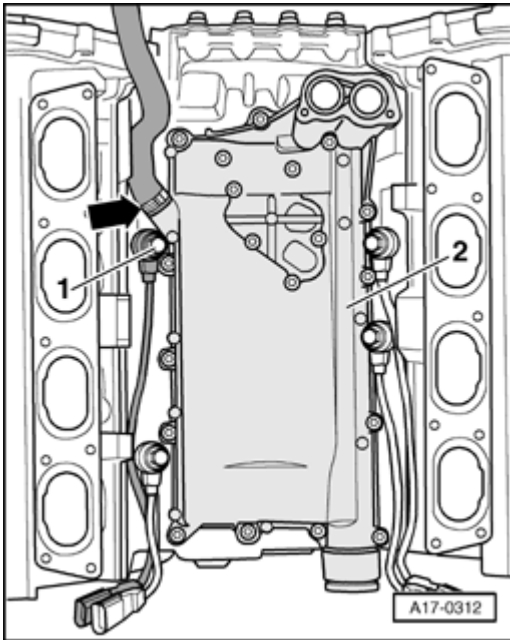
Identifying Right Rear Knock Sensor Bolt, Crankshaft Housing Ventilation & Oil Check Valves Cover
